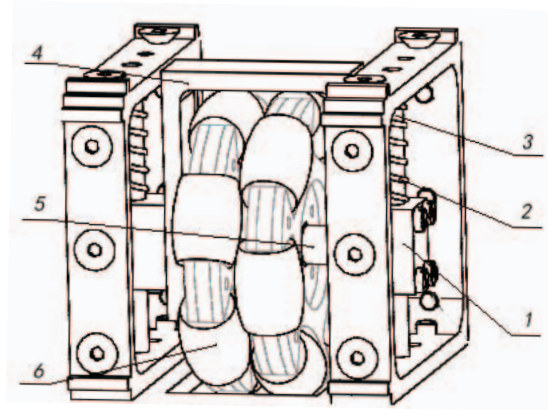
The driven wheel sketches. 1. Floating block 2. Floating spring 3. Floating guide rod 4. The fixed frame 5. Driving shaft 6. Driven wheel.
